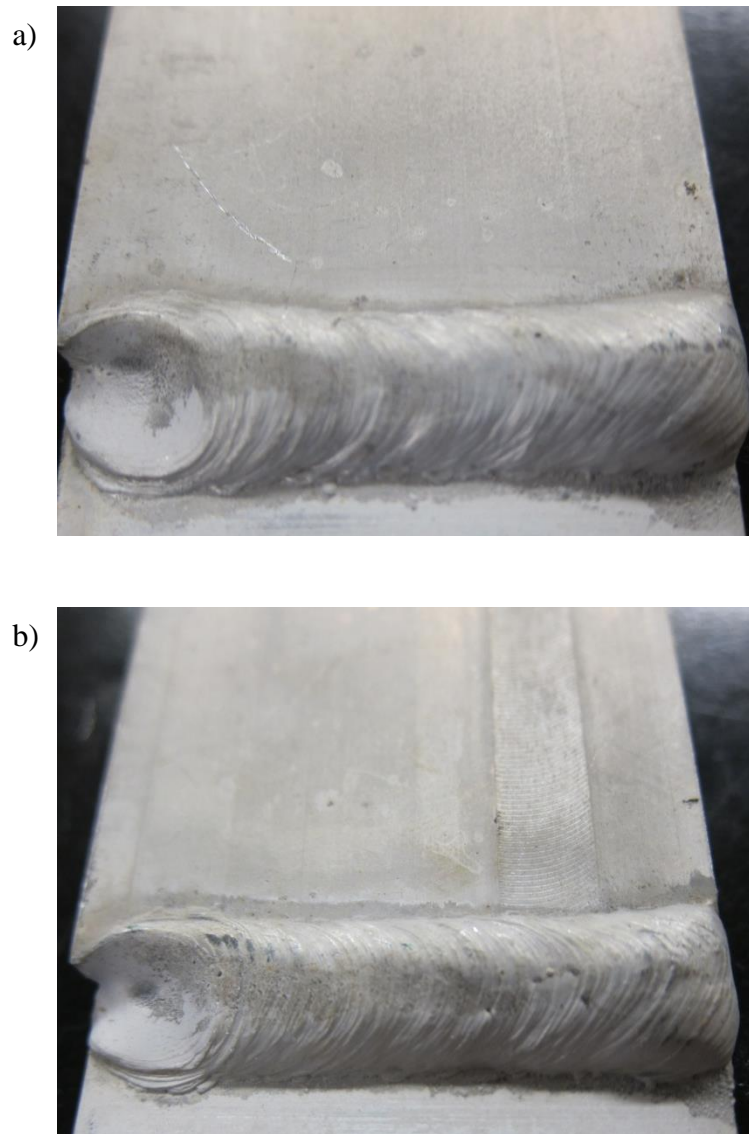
Close-up images of lap-joint welded configuration C (ER5356/AA7108/L) in the (a) as-welded T6 condition and (b) as-welded T6+PB condition post exposure to GMW-14872.
